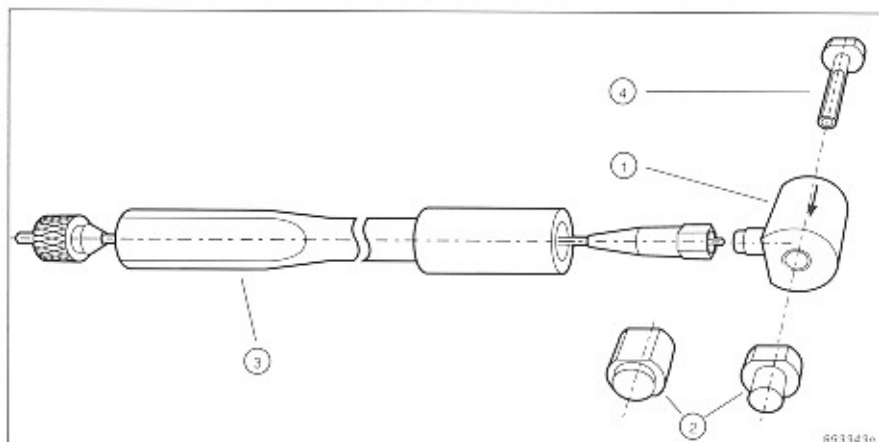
Exploded view of the Force Transducer Type 8203 with the hammer kit
